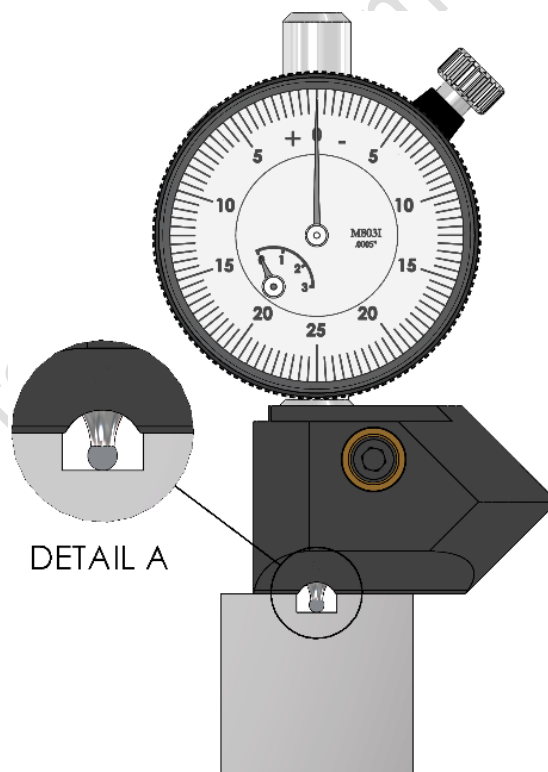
External Thread Height Gauge on Setting Standards (Buttress Thread Height Gauge on Block)
